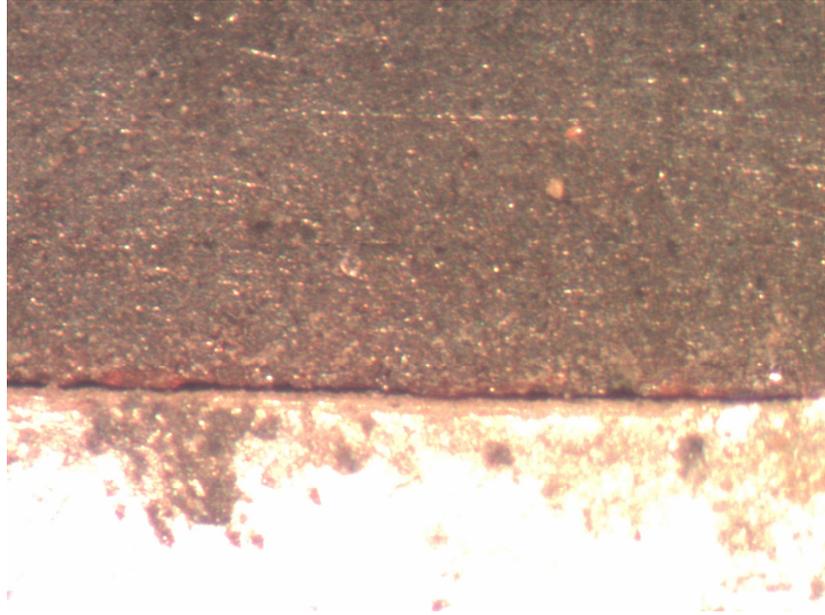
150°C Epoxy 3 on FR4 Test Board Aluminum Edge Crack
